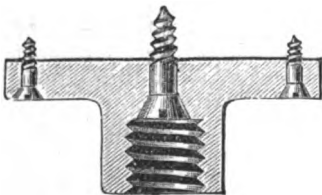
MODIFIED CONICAL SCREW CHUCK.
